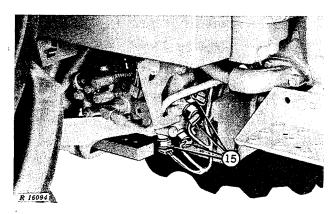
Power Front Wheel Drive Switches (Power Shift Tractor)
